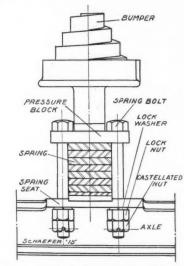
Jeffery Quad Spring Mounting and Bumper
